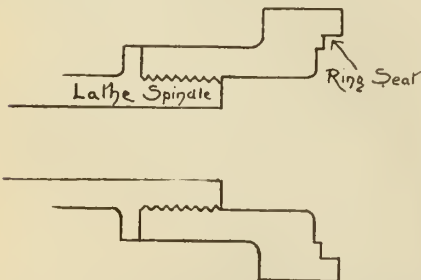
Spring Chuck for Facing Rings Before Cutting.
